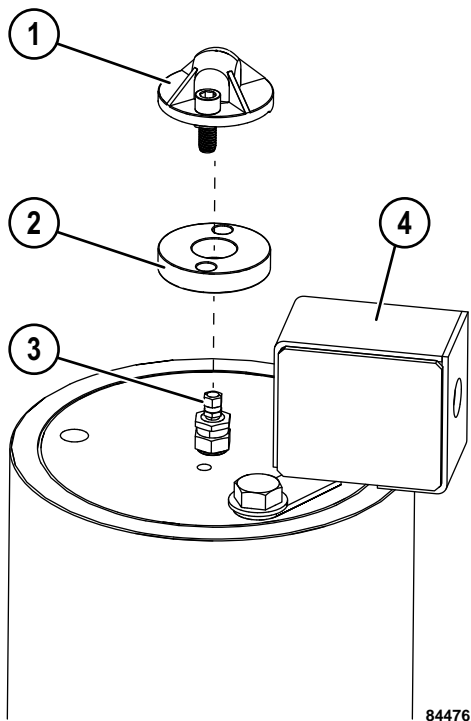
TOP OF PISTON ACCUMULATOR
